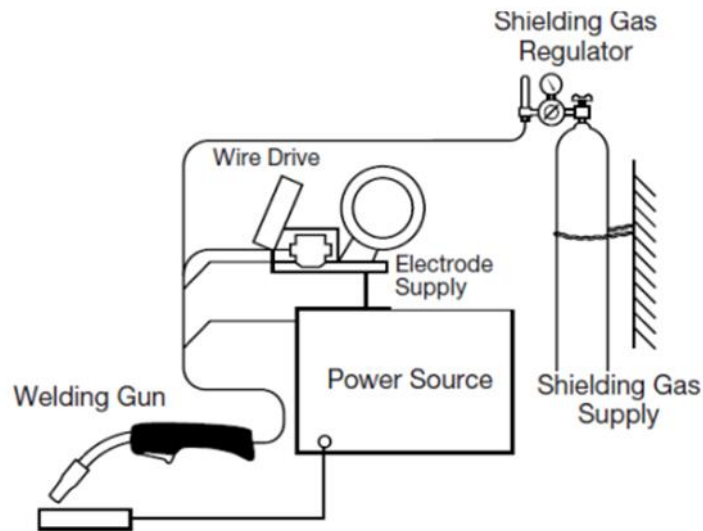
The Gas Metal Arc Welding Process is Shown in A Diagram [16].
